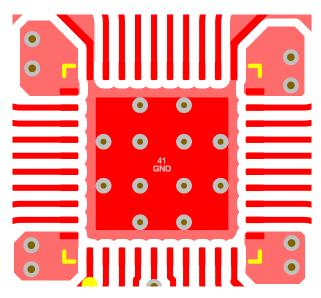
PCB layout example for LMK1D1212, Top Layer
